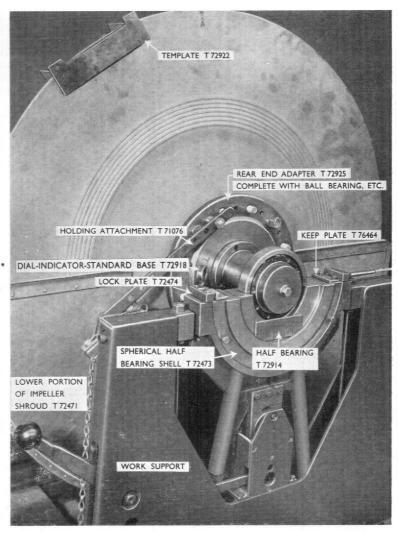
Holding attachment T.71076 and template T.72922 applied to impeller, in Gisholt 3 U.J.P. machine.
